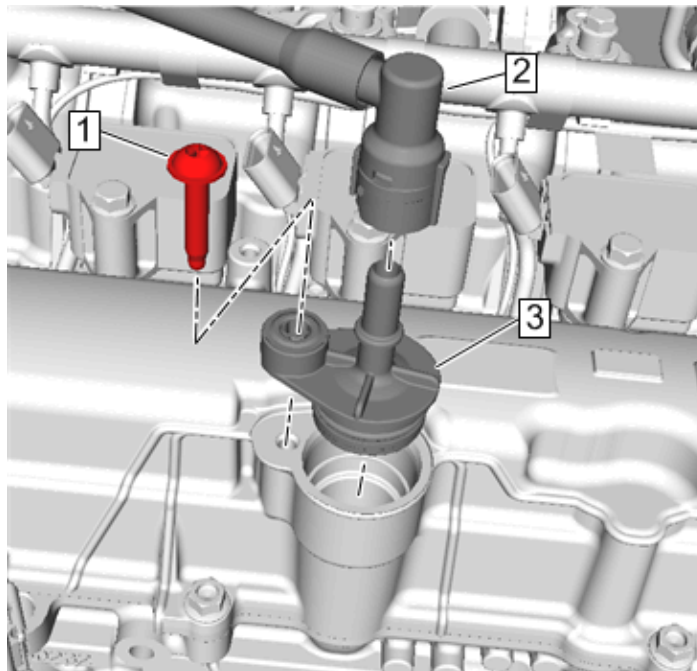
Positive Crankcase Ventilation Valve, Tube And Bolt
